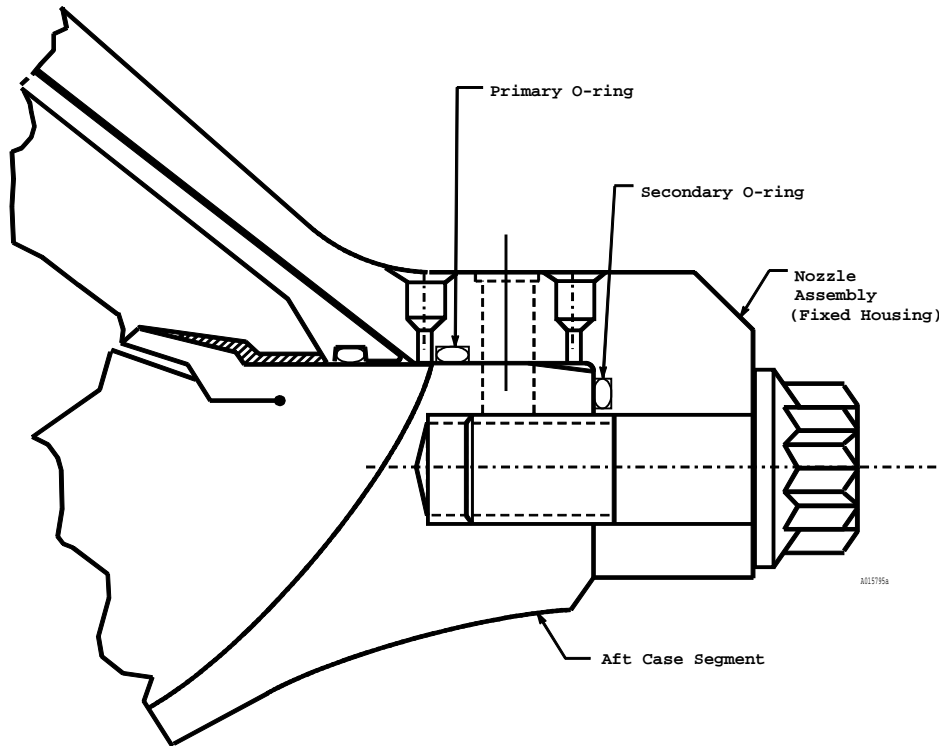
Case-to-Nozzle Joint, Primary and Secondary O-rings
